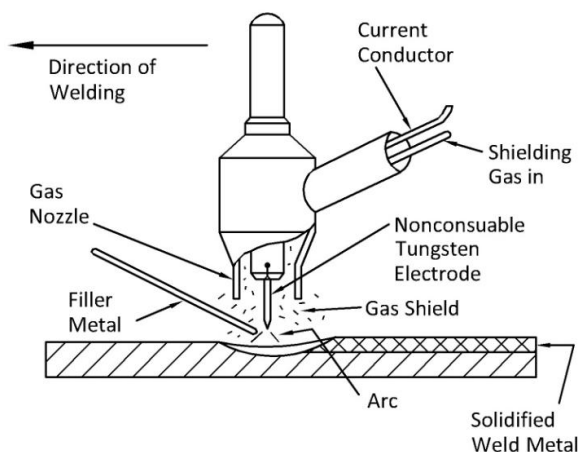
Gas Tungsten Arc Welding (GTAW)
